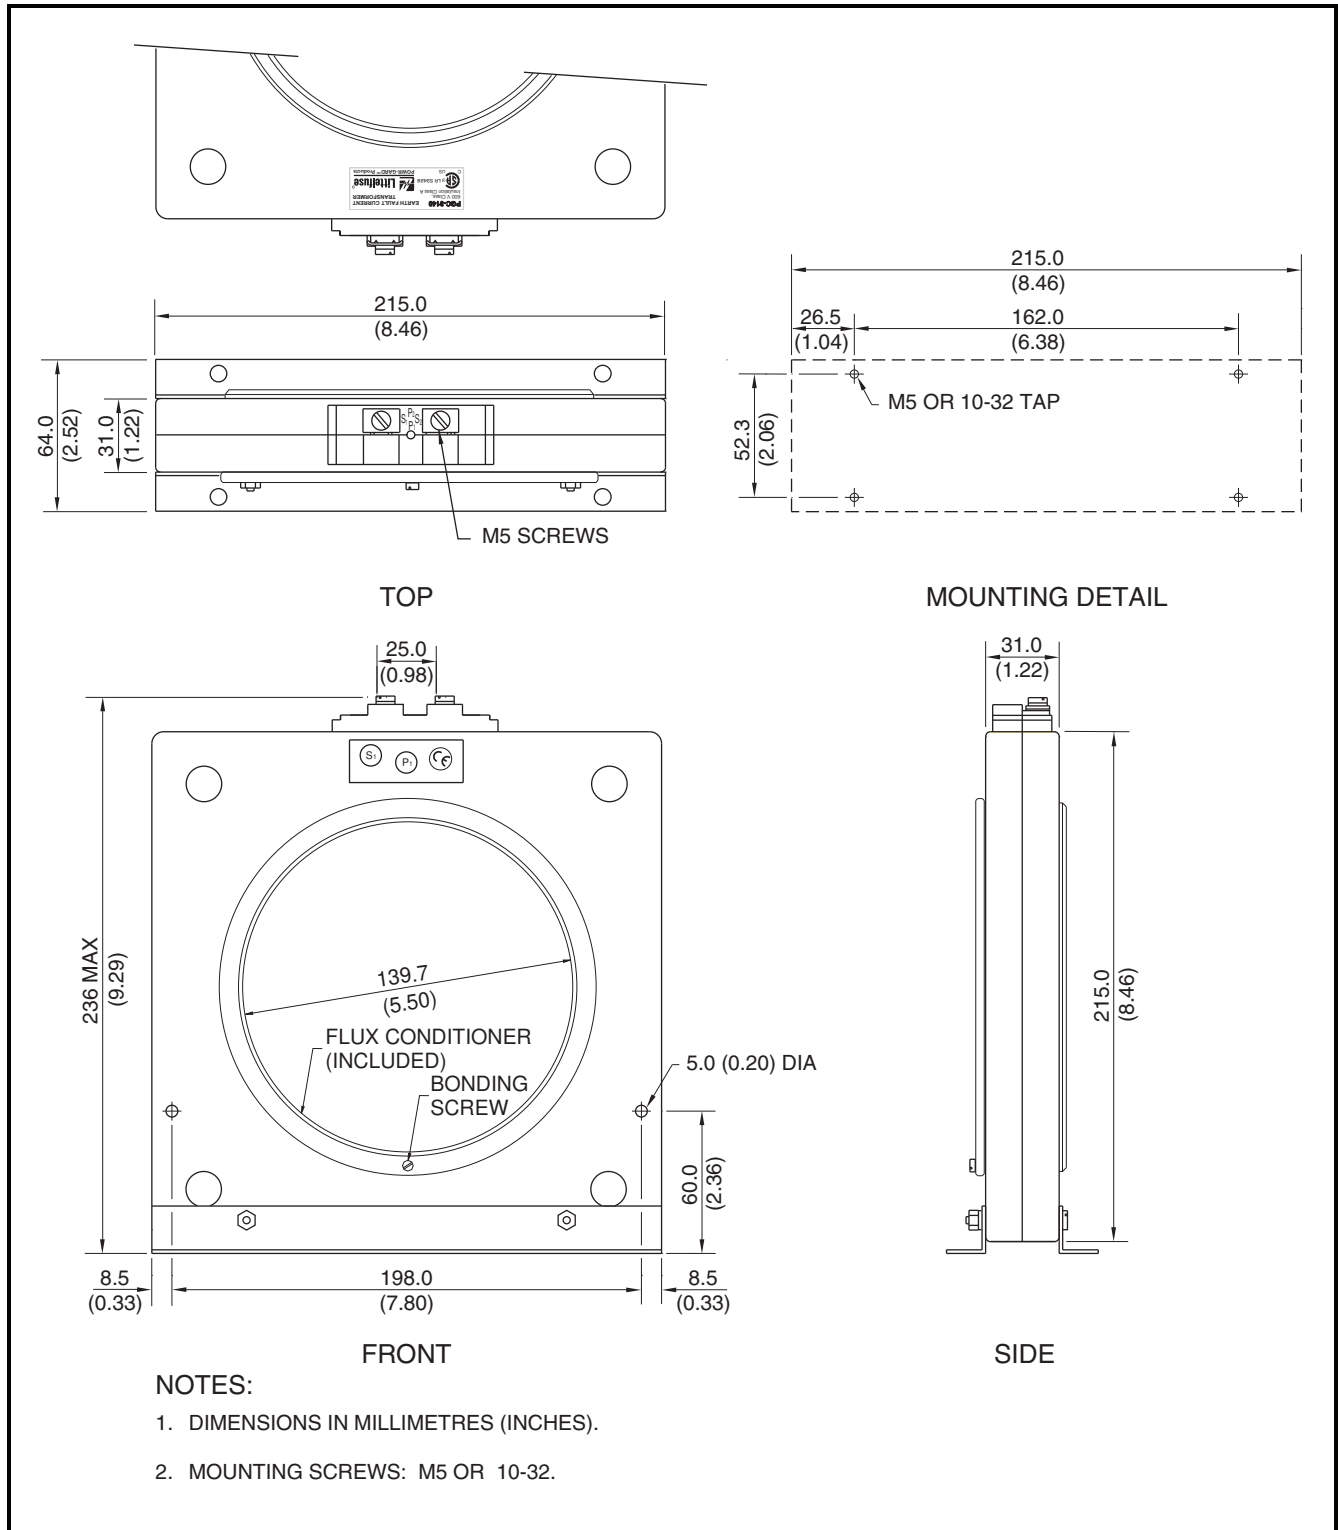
PGC-3140 Outline and Mounting Details.
